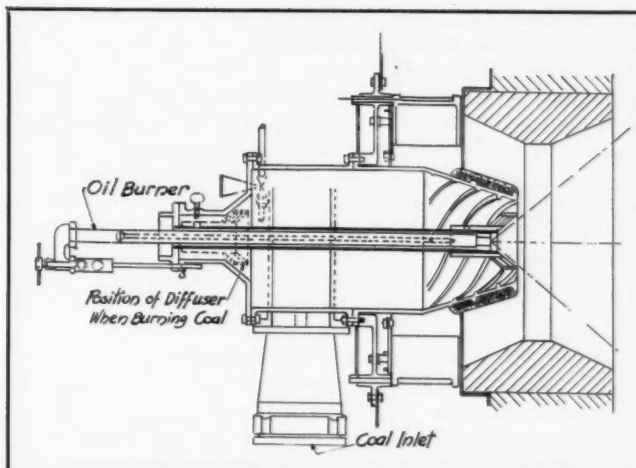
Oil firing arrangement with Combustion Engineering Type R-3-29 coal burner, The Public Service Electric & Gas Company, Burlington Station.
